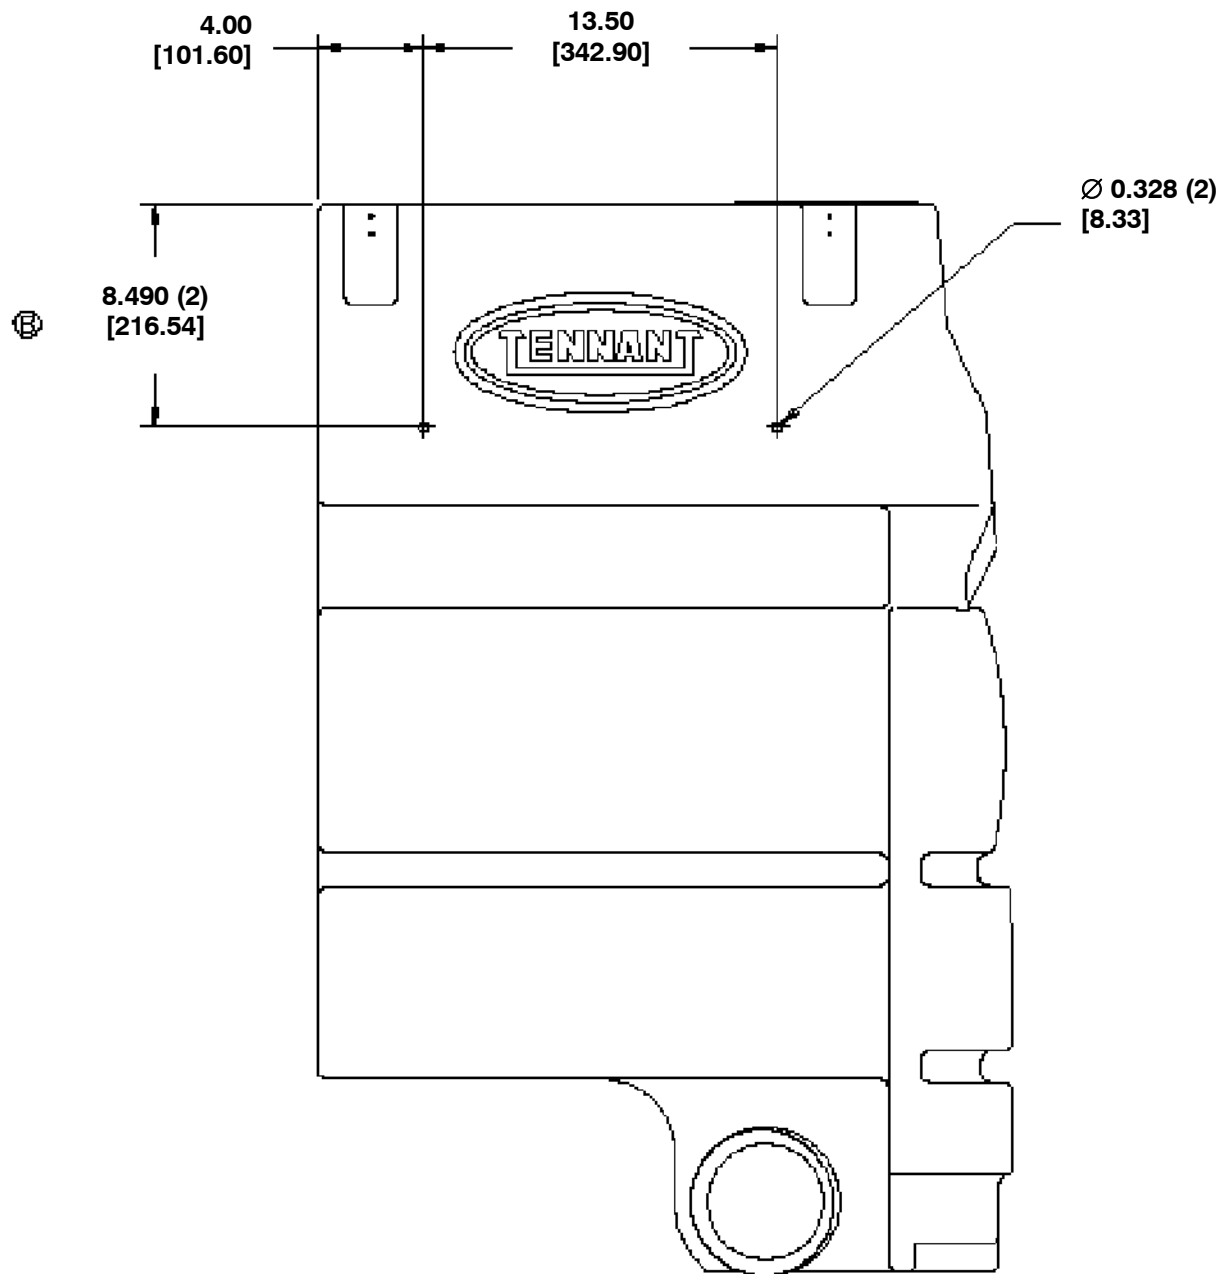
POWER WAND BAG MOUNTING HOLE LOCATION
